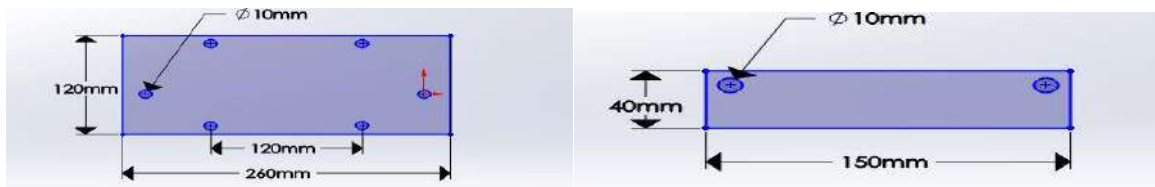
Fixture design: (a) Base plate (b) Cover plate
